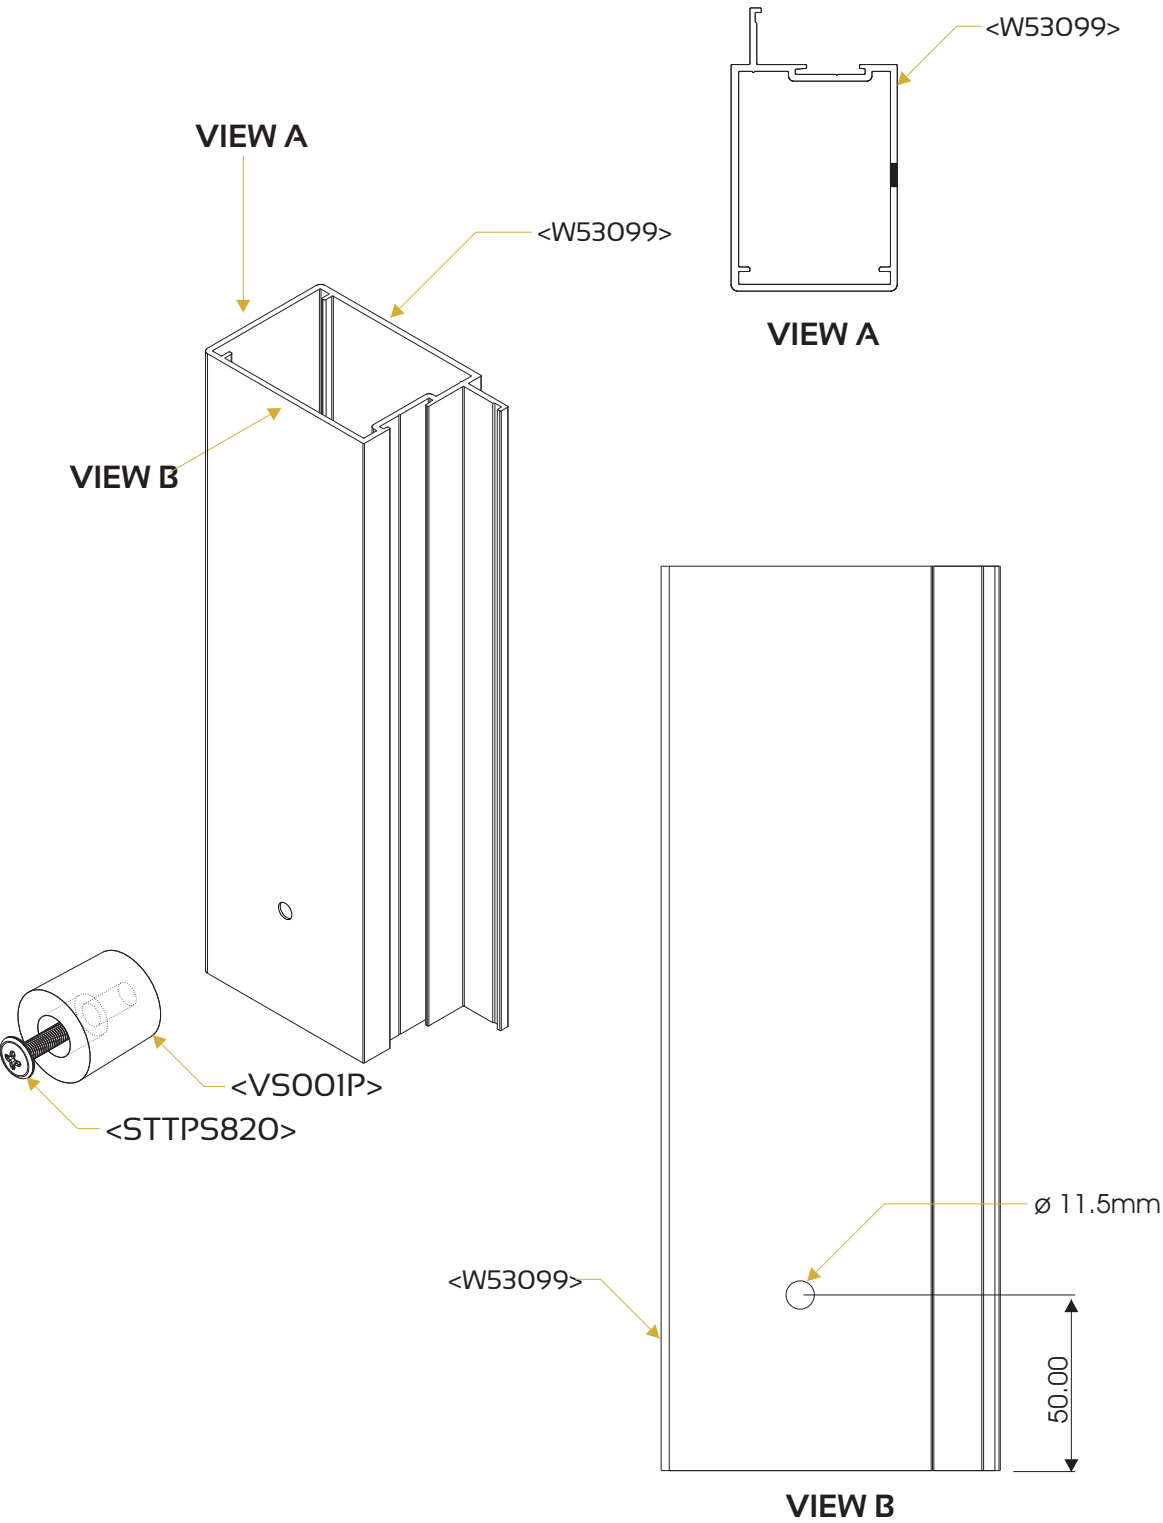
#### DETAIL TYPICAL TO HEAD AND SILL OF FIXED AND SLIDING LIGHTS
